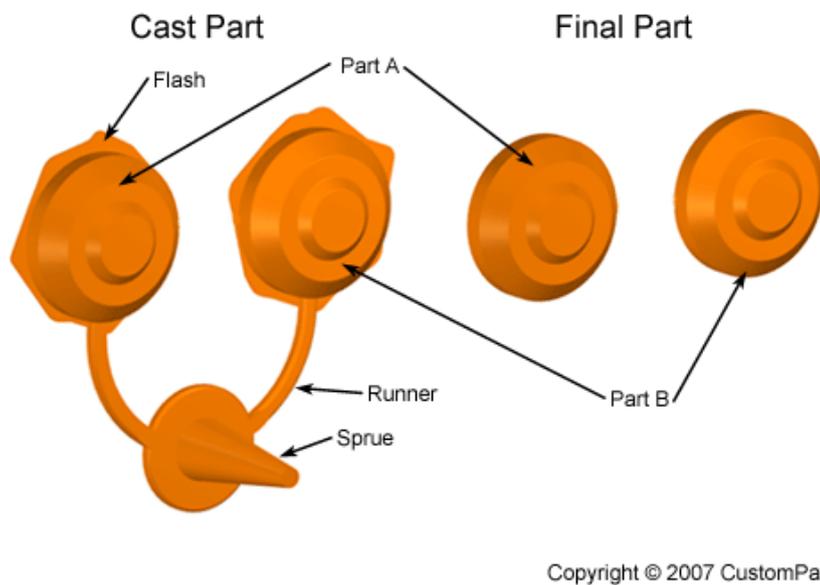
Examples of cast and final parts that are produced by HPDC [21]
